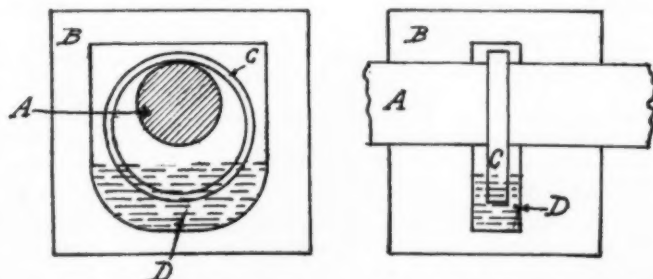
Principle of oil ring. A, shaft; B, bearing; C, oil ring; D, oil. The oil chain is very similar, the flexible links conforming to the contour of the shaft for the upper half of its circumference.
